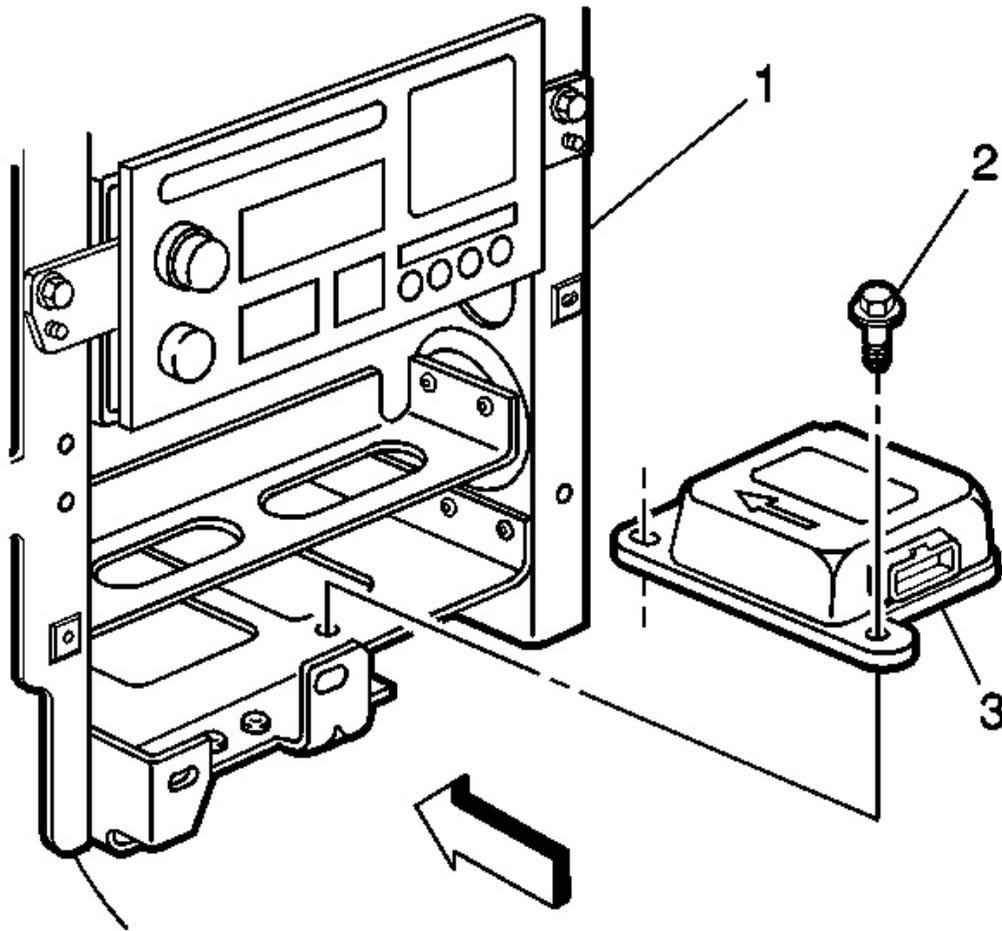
I/P Center Support System, SDM & Mounting Fasteners
